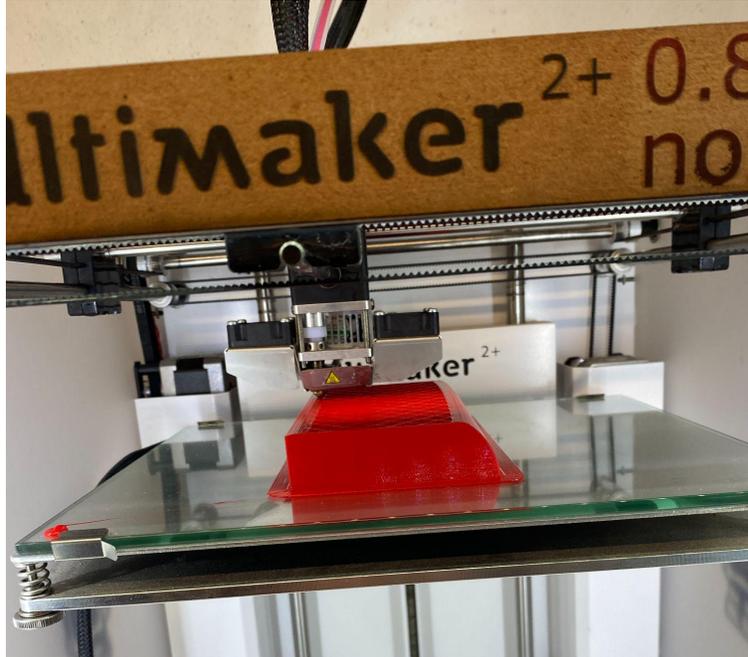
Exterior 3D model of the building in the process of being printed using an Ultimaker 2+ printer.
